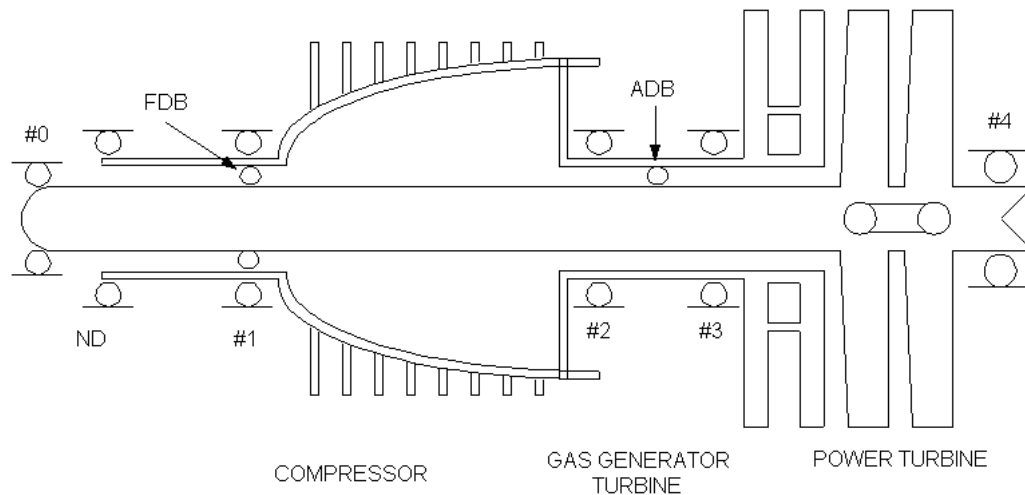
Two spool aircraft turbine engine with 8 bearings
